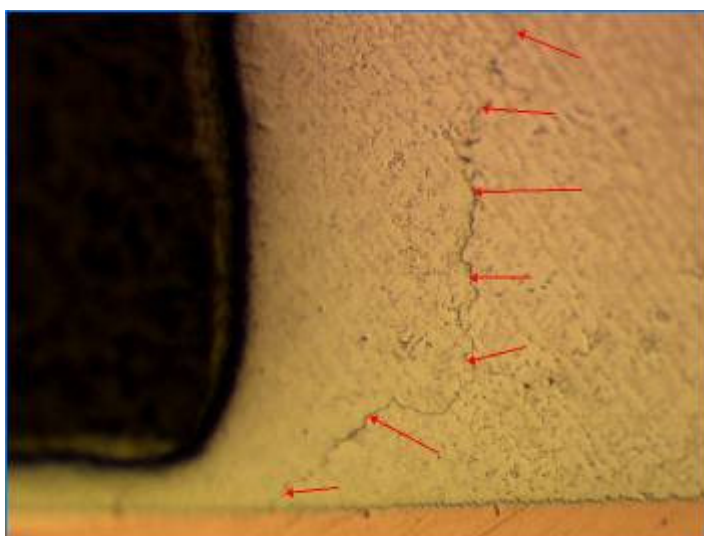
cross section, SN63, U52, right pad solder crack, 200xa
